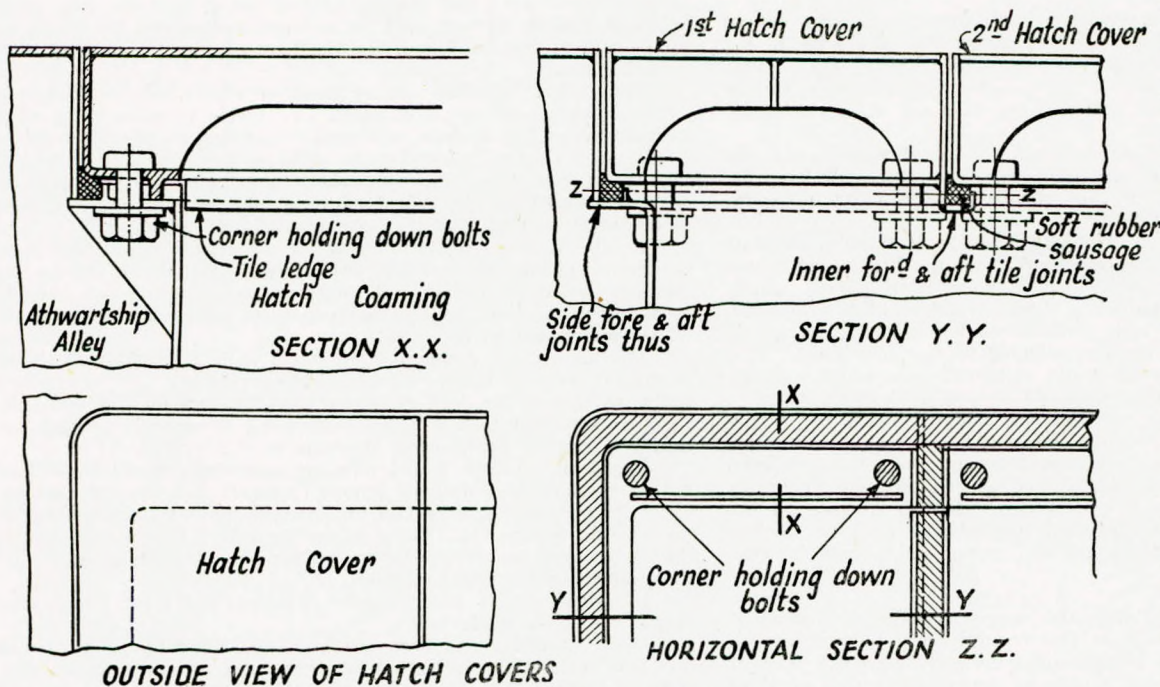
Flush fitting welded steel watertight flying-deck hatch covers for cargo warship.
